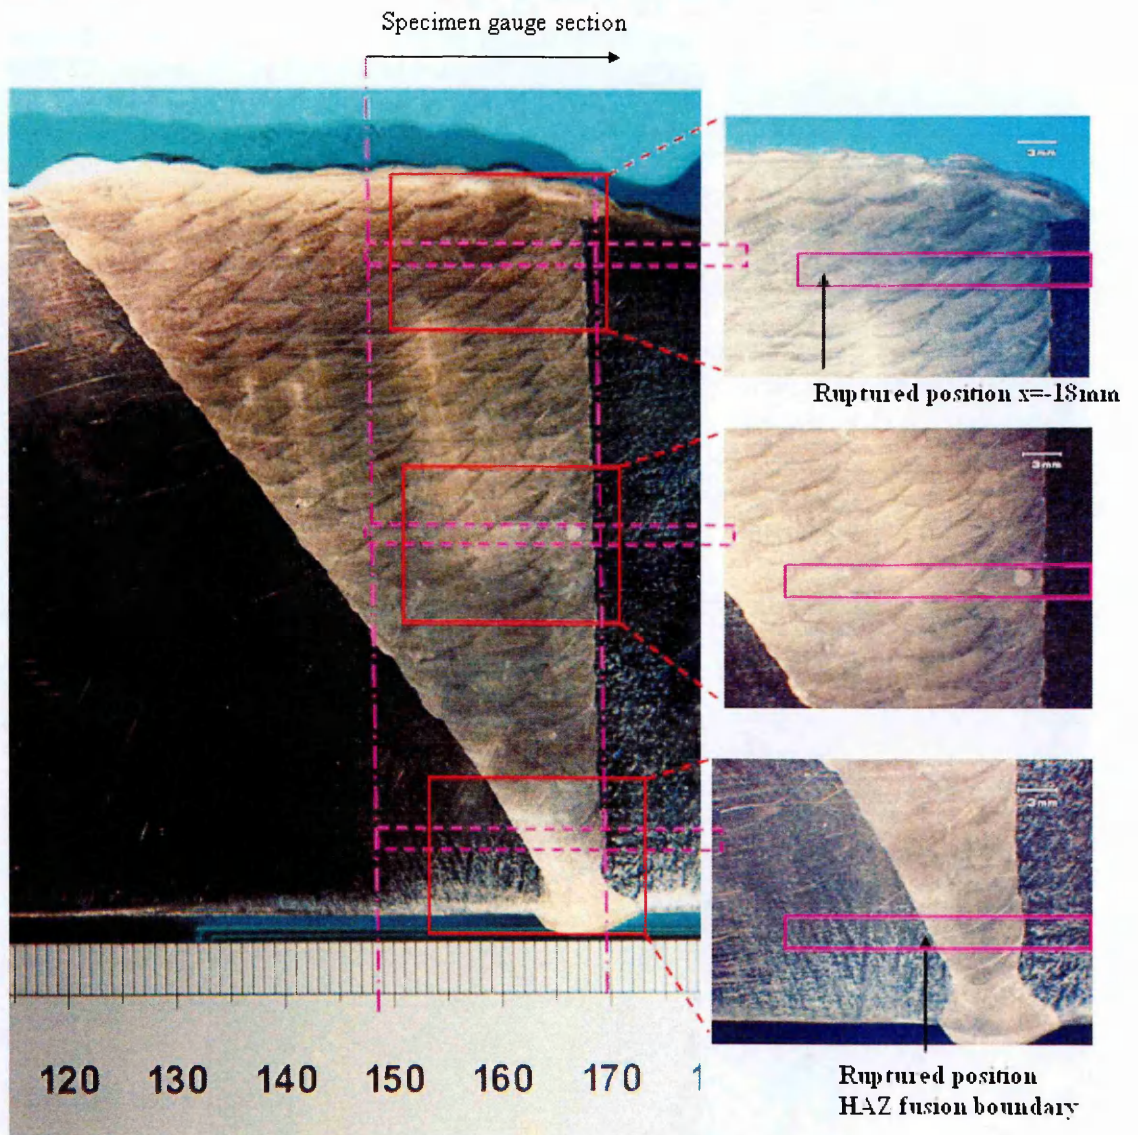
Photograph of etched section showing the stainless steel weld pass deposition sequence with enlarged details indicating positions of the specimen gauge sections and rupture (top and bottom)
